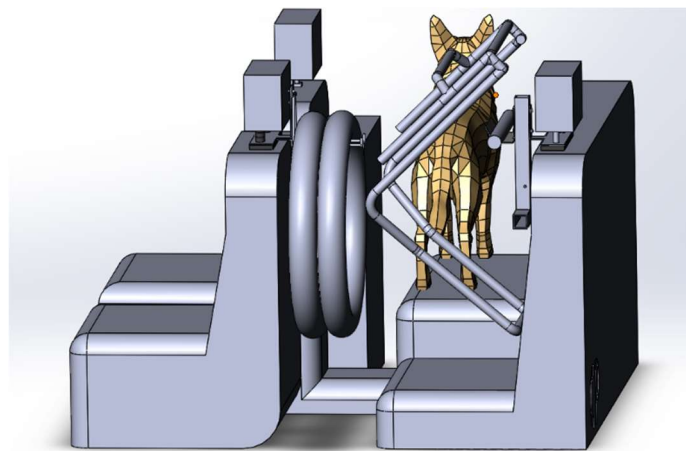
Expected Storage Arrangement for Wheelchair (front right), Wheels (front left), and Dog Ramp (back left)
